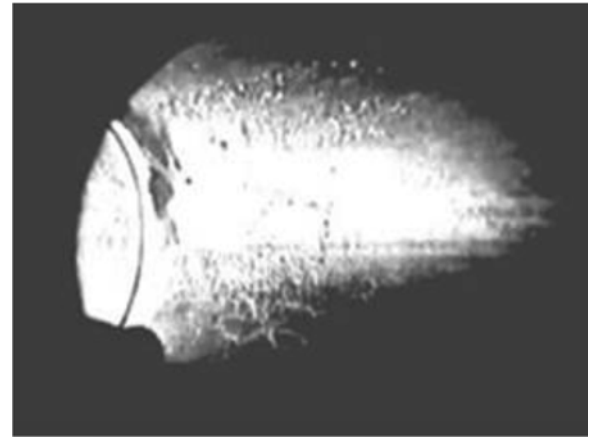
(b). View of inside of weld shown in Figure 6-25(a).
